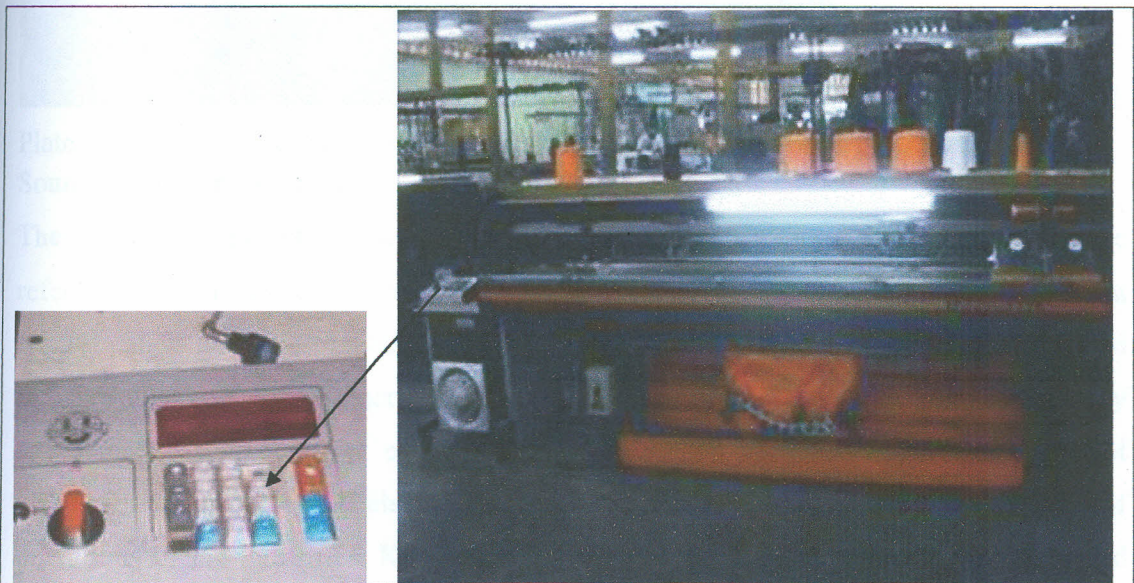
Automatic Universal flapping machine at knitting section of Ken-Knit Ltd
